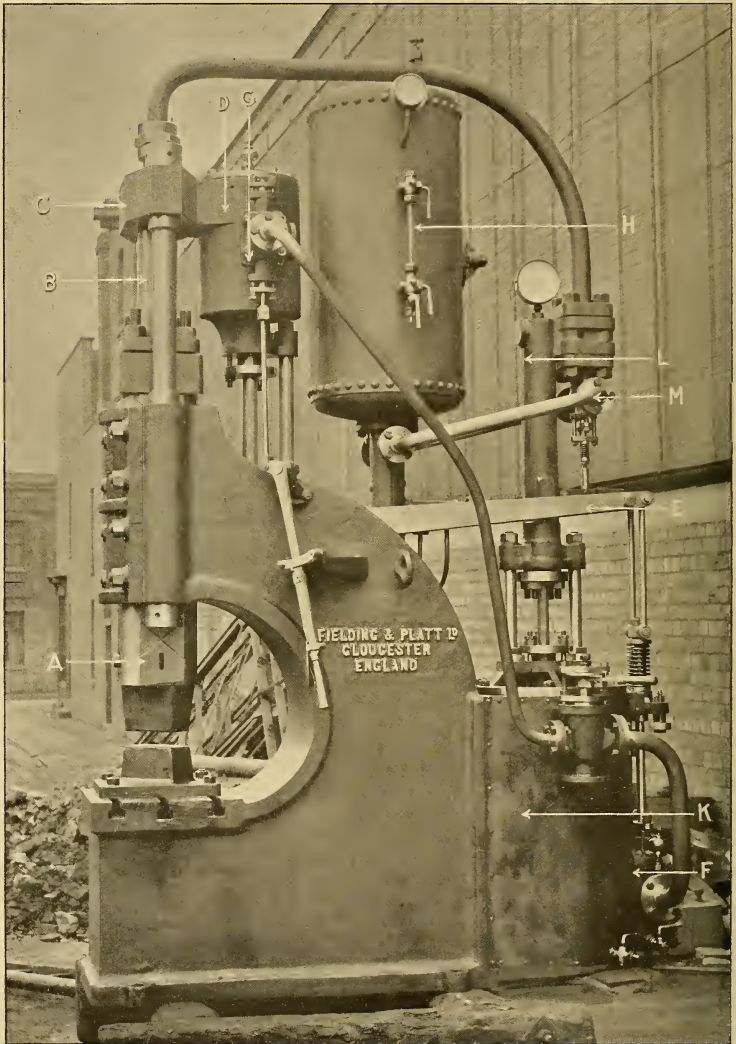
A PRESS USED ON BOARD H. M. TORPEDO-SHIP "HECLA." BUILT BY MESSRS. FIELDING & PLATT, LTD., GLOUCESTER
